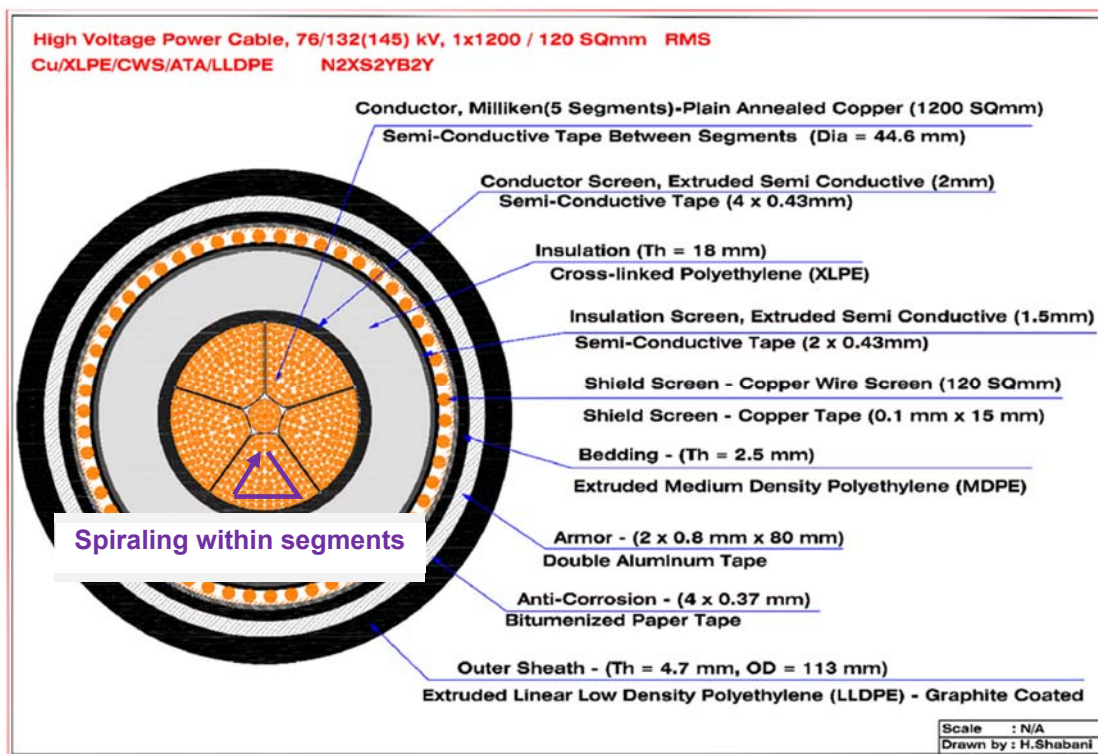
The construction of a large diameter (Milliken) single-core cable [87]
